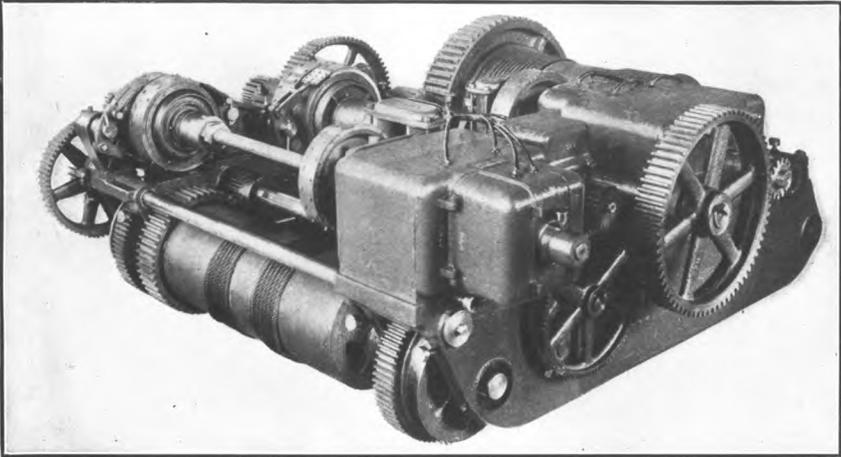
CRANE TROLLEY, UNGUARDED.
